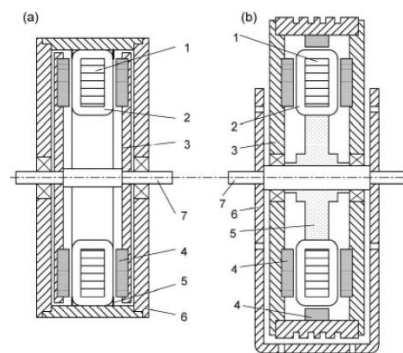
Outer rotor PM machine from [6] (3/iron-4/magnets), (a) two-axial rotors, (b) with a supplementary radial-flux rotor
